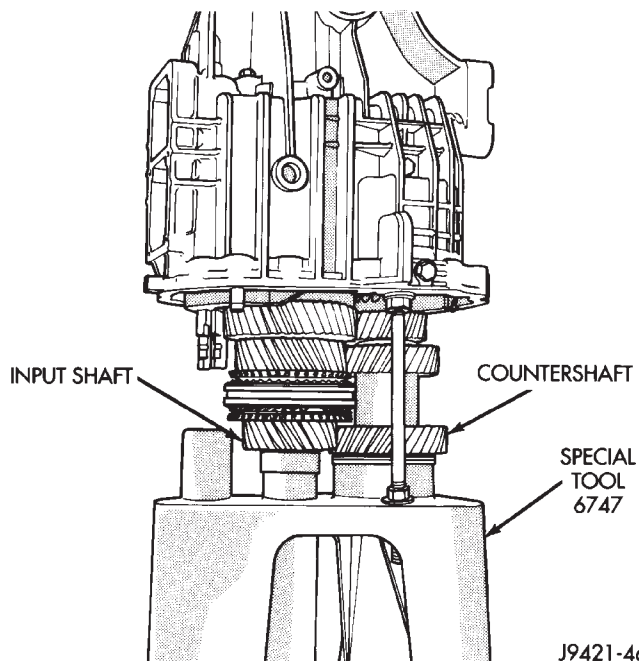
Geartrain And Housing Mounted On Fixture Tool
